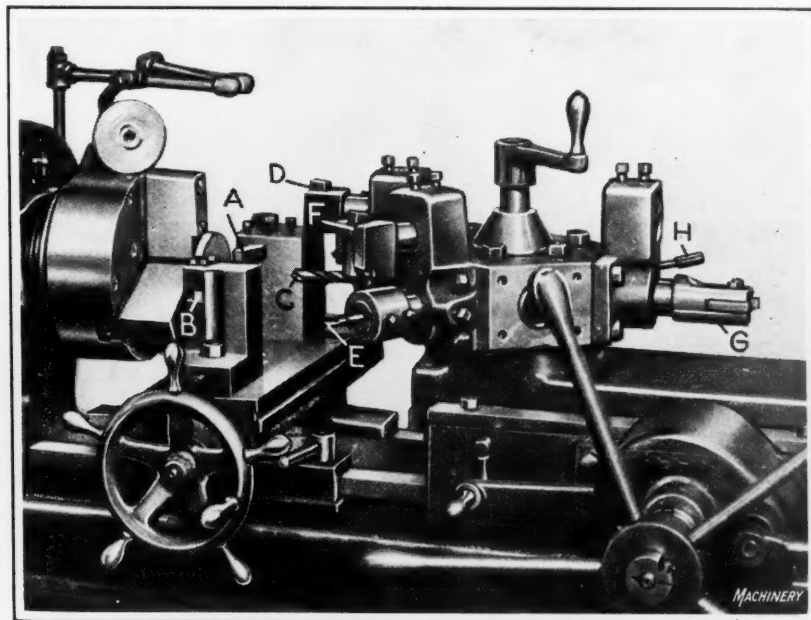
Turret Lathe Equipment used for boring, counterboring, and facing Water Pump Impellers
